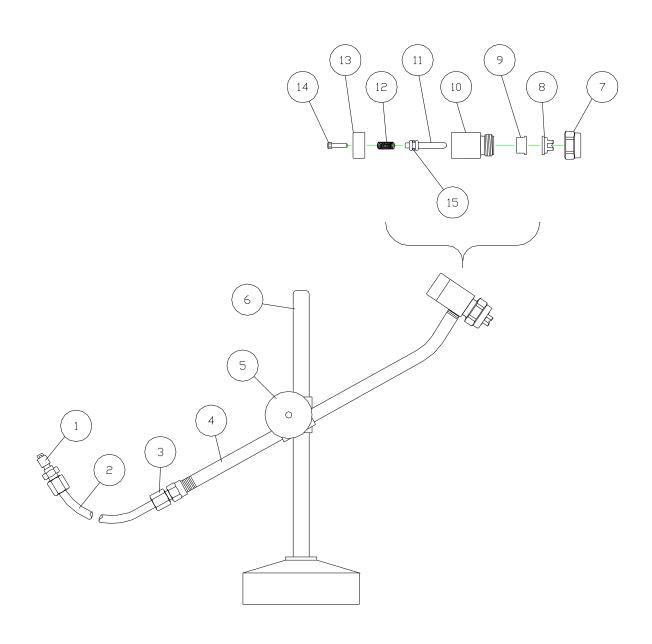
Magnetic Base Post, Tube and Clamp Piston Spray Assembly
